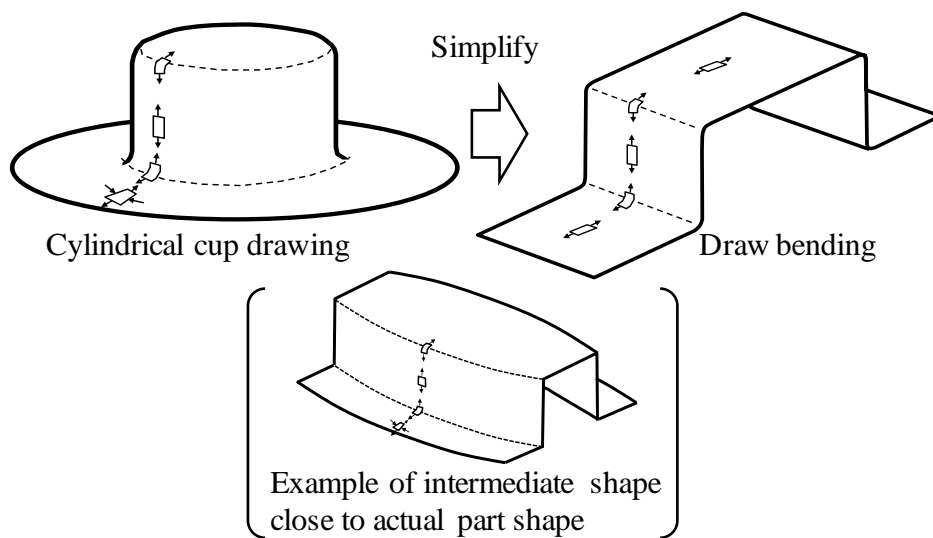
Schematic illustration showing cylindrical cup deep drawing, draw bending together with example of intermediate shape close to actual part shape
